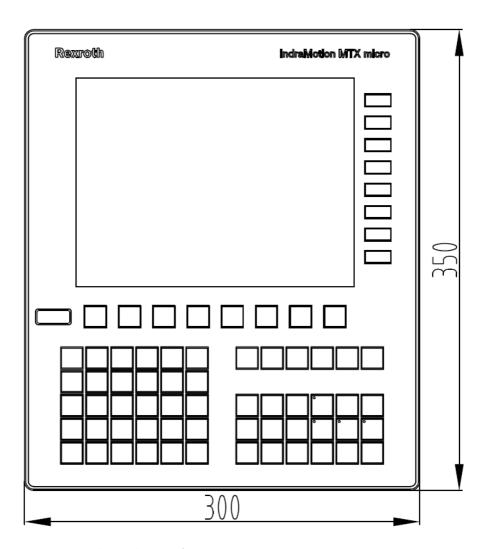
VDP82.1FKN-C1-NN-EN dimensions
